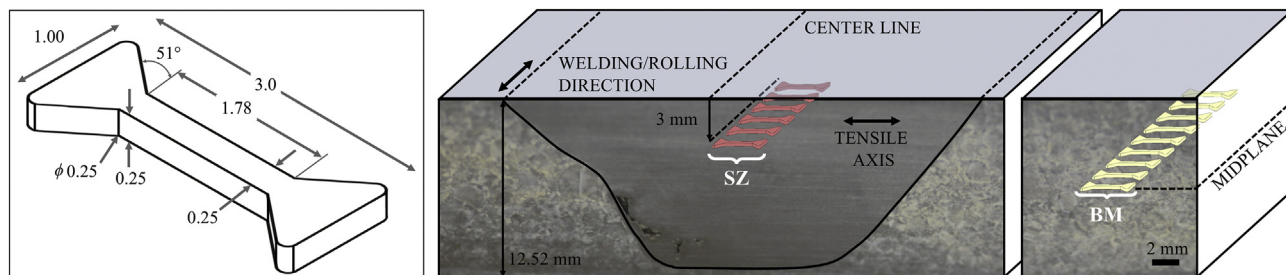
Microtensile sample schematic with dimensions (in millimeters) and sample locations in the Ti-5111 plate.
